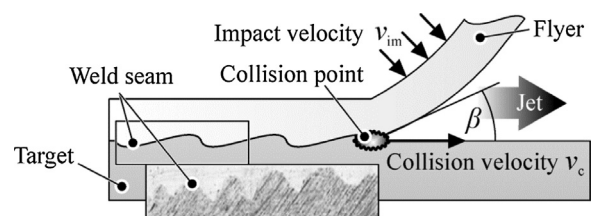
Schematic of impact welding (Mori et al., 2013).
